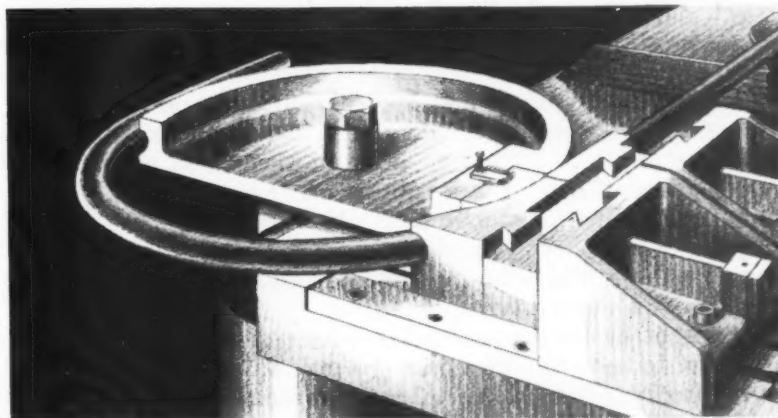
Machine Ready to Bend the Tube to a Full Circle
